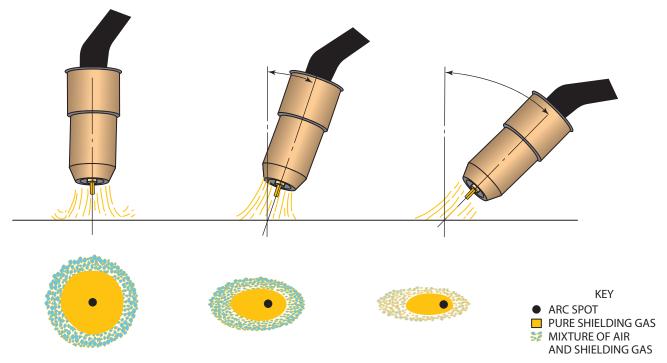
The welding gun angle affects the shielding gas coverage for the molten weld pool.
